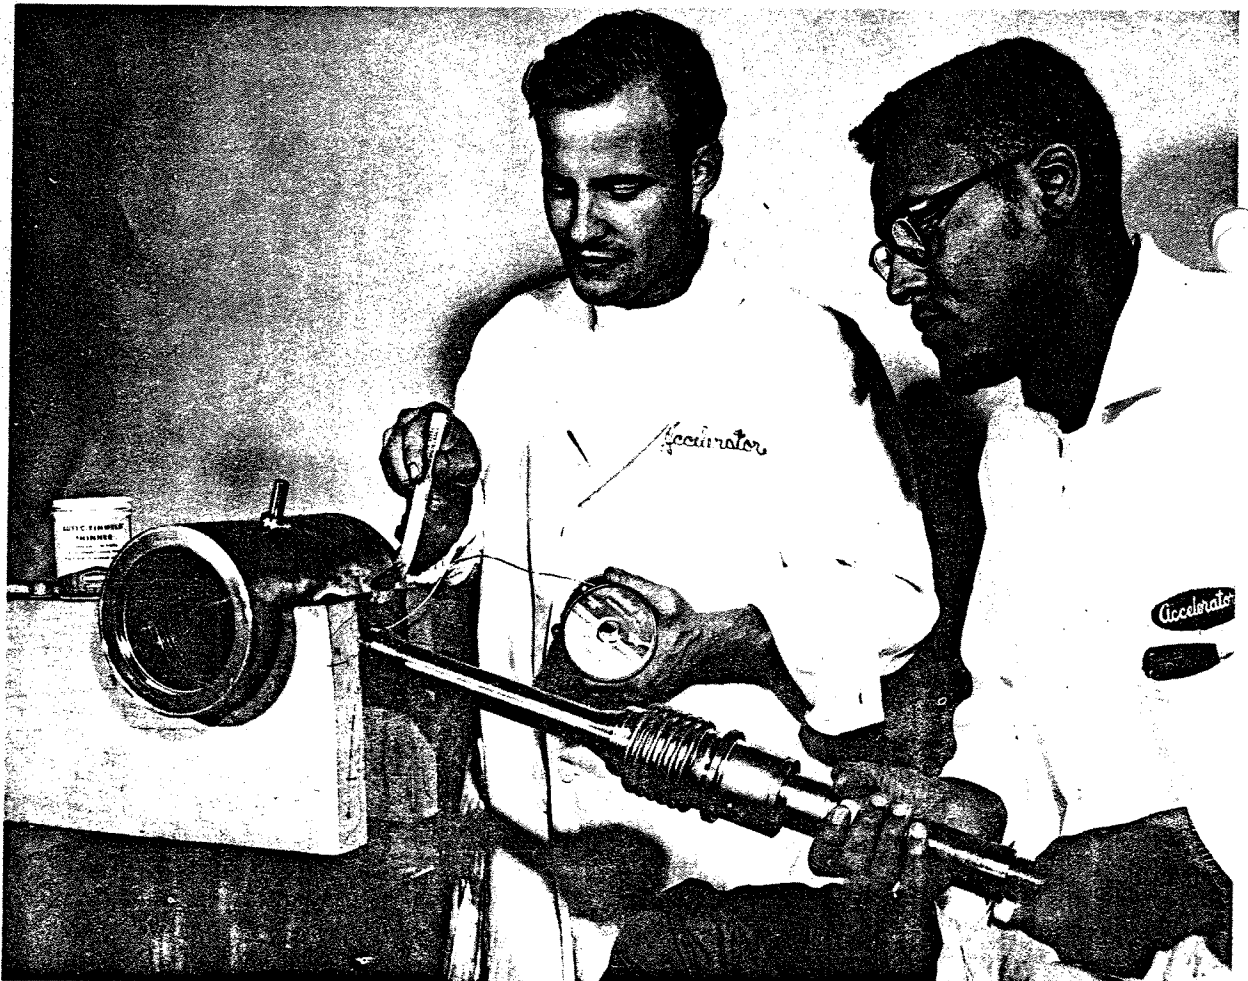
c.3 Soldering drift-tube stem to body.
